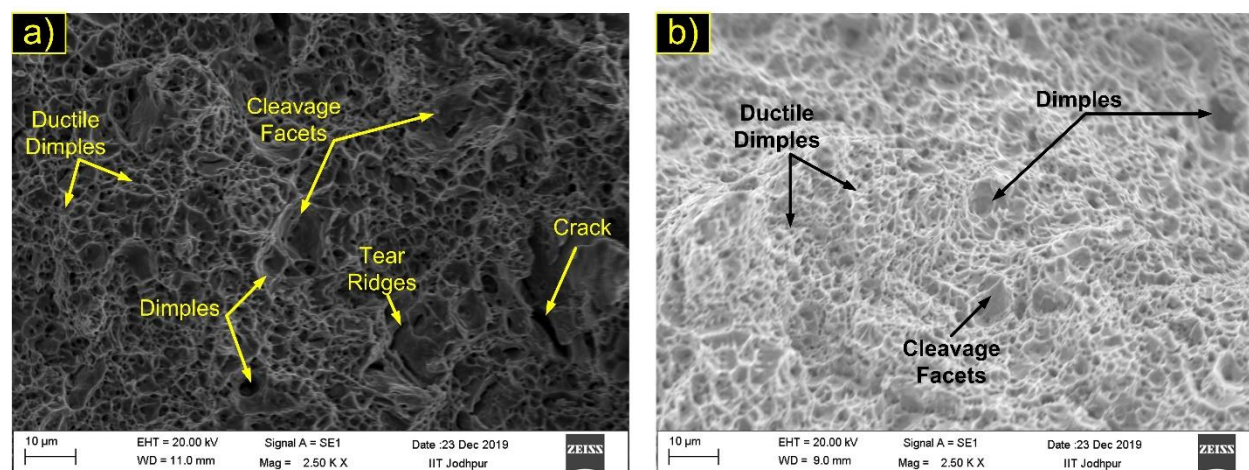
Fractography of welded tensile specimens fabricated using (a) Commercial electrodes (b) E7M electrodes
